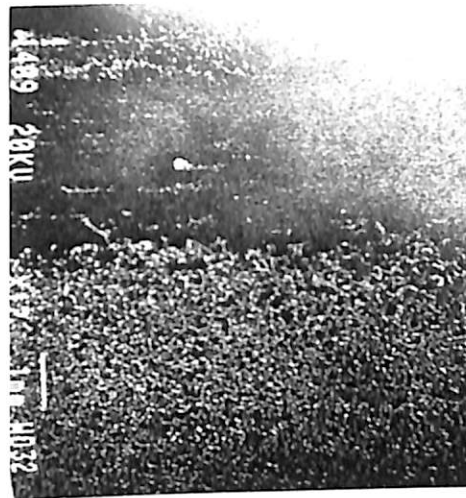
Micropitting in raceway of cylindrical roller bearing due to heavy surface stressing.
